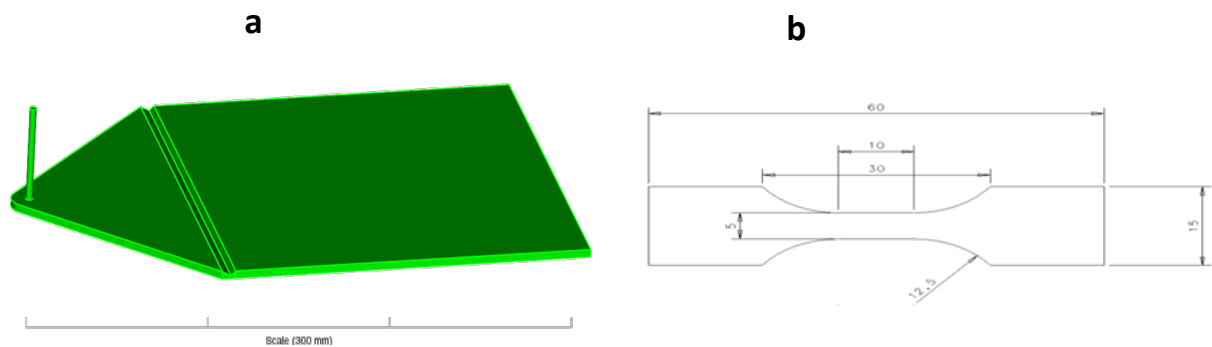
a) injected test plate b) ASTM D1022 specimen dimension
